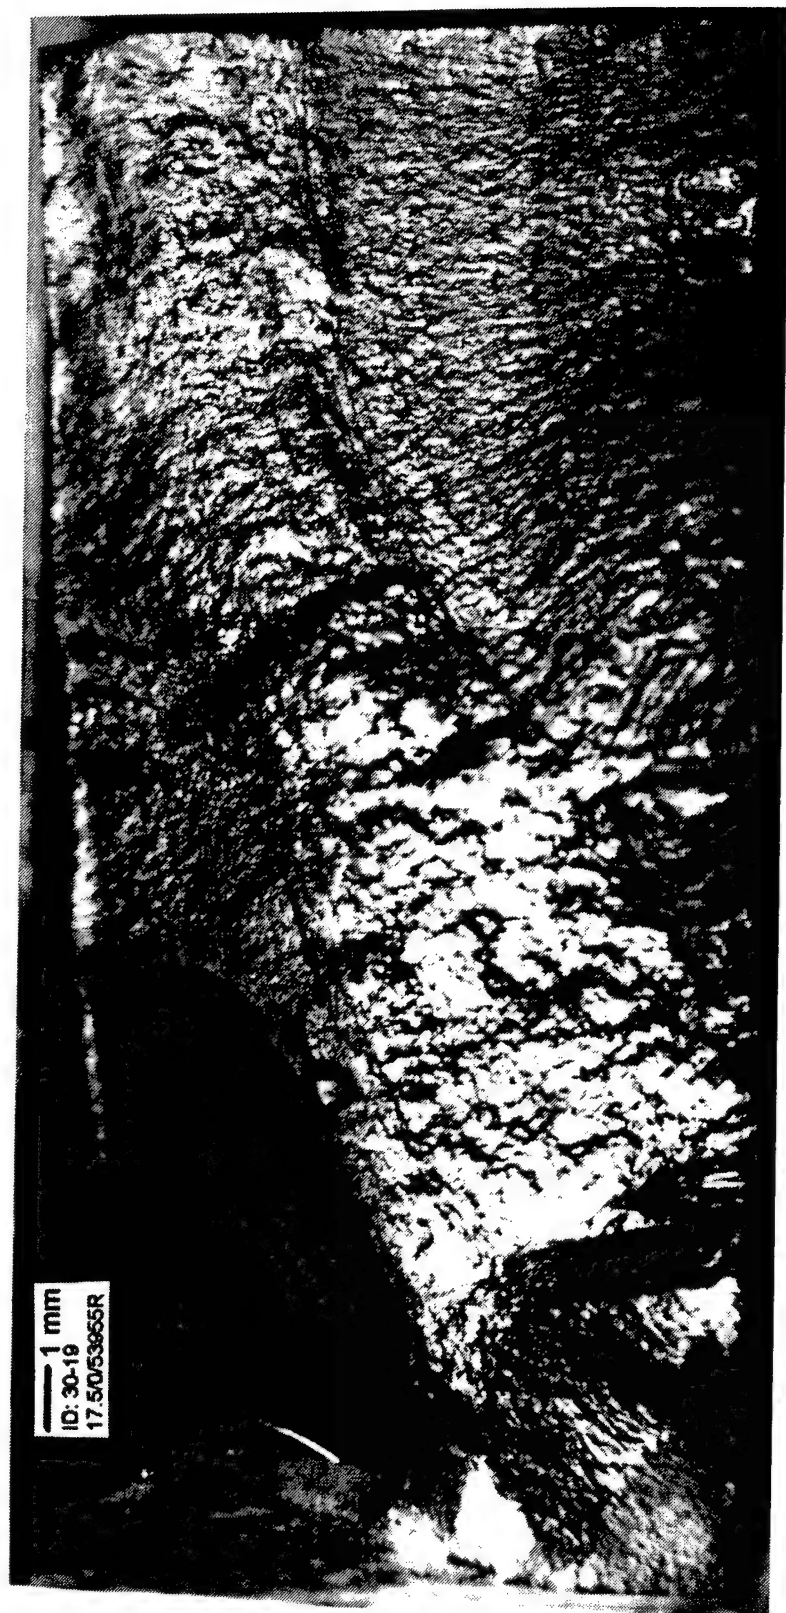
Fatigue fracture surface of the HSLA-80 but weld sample subjected to random loading:
